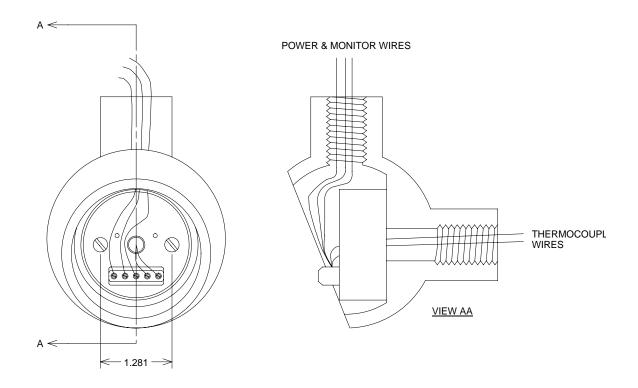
Assembly of the 18-811 Transmitter inside a thermocouple head
